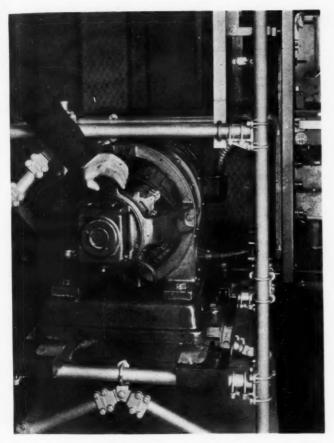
RUBBER SPRINGS APPLIED TO ELECTRIC-MOTOR MOUNTING
